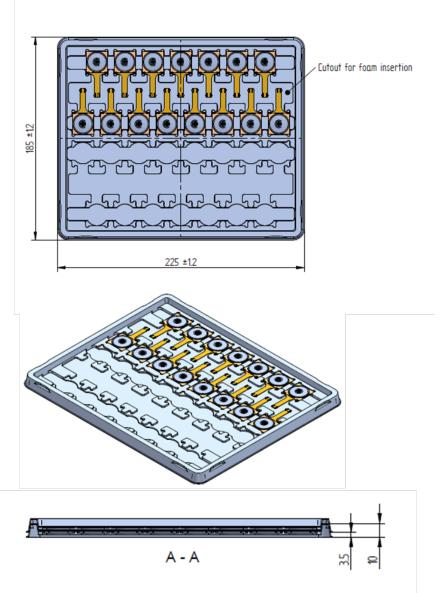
Dimensional drawing of PowerHap 1919 packaging tray
